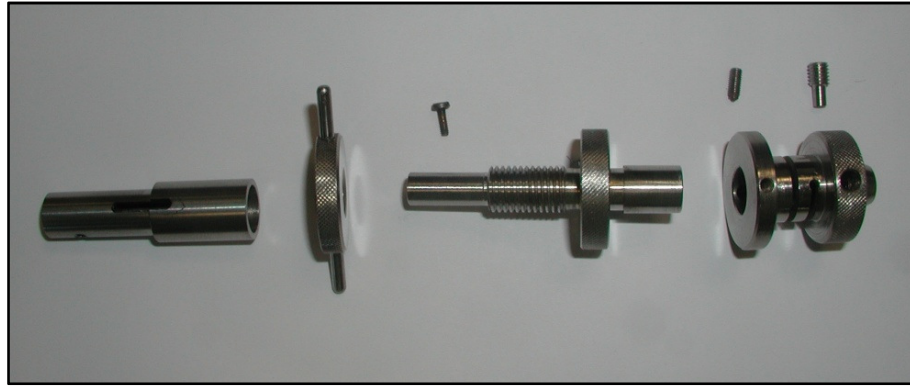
FABRICATED ACTUATOR COMPONENTS
